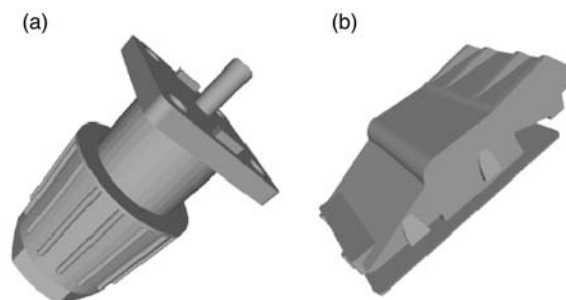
Artefacts to be manufactured by SLS: (a) support for aluminium profile; (b) tension latch
